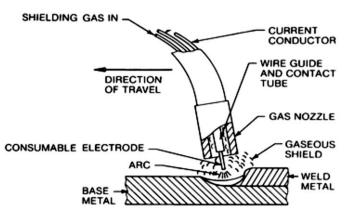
Schematic set-up for gas metal arc welding process
